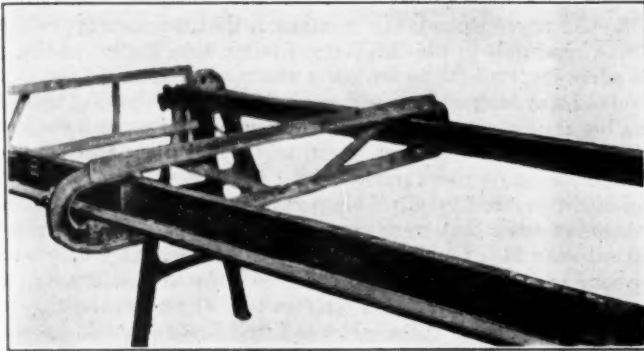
FRAME OF CLAMP CARRIER EQUIPPED WITH CENTER RUNWAY (Bracket on front end of this runway furnishes curved extensions to top and bottom runways, the lower one of which extensions overlaps the upper.)
